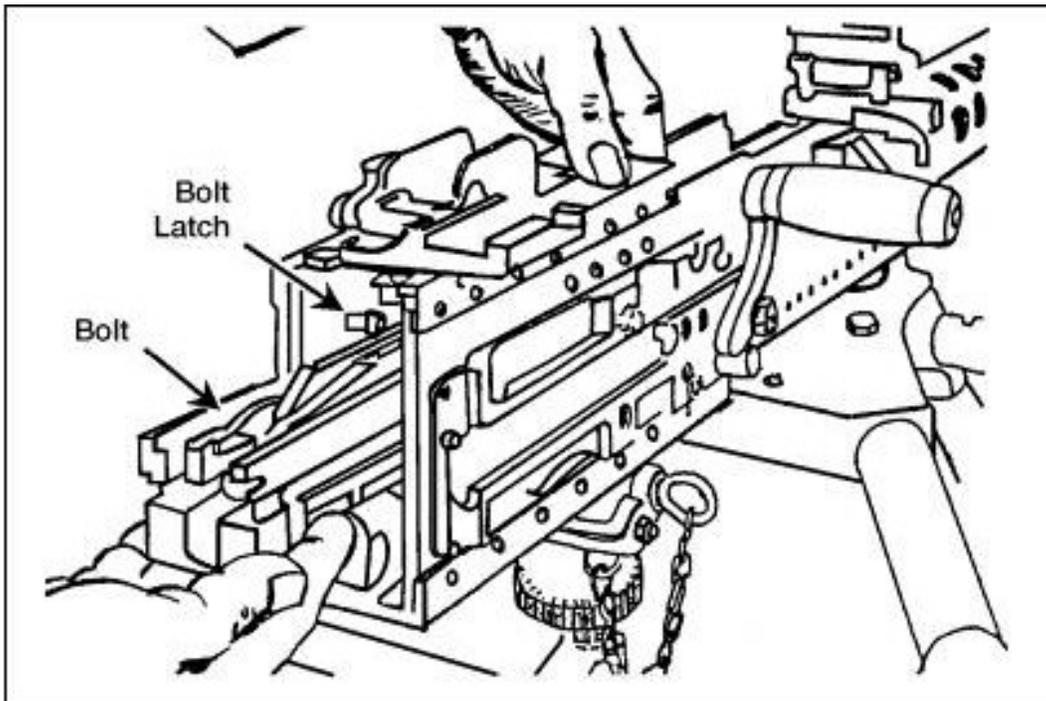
ST-1025_08 (Removal of the bolt from the receiver)
